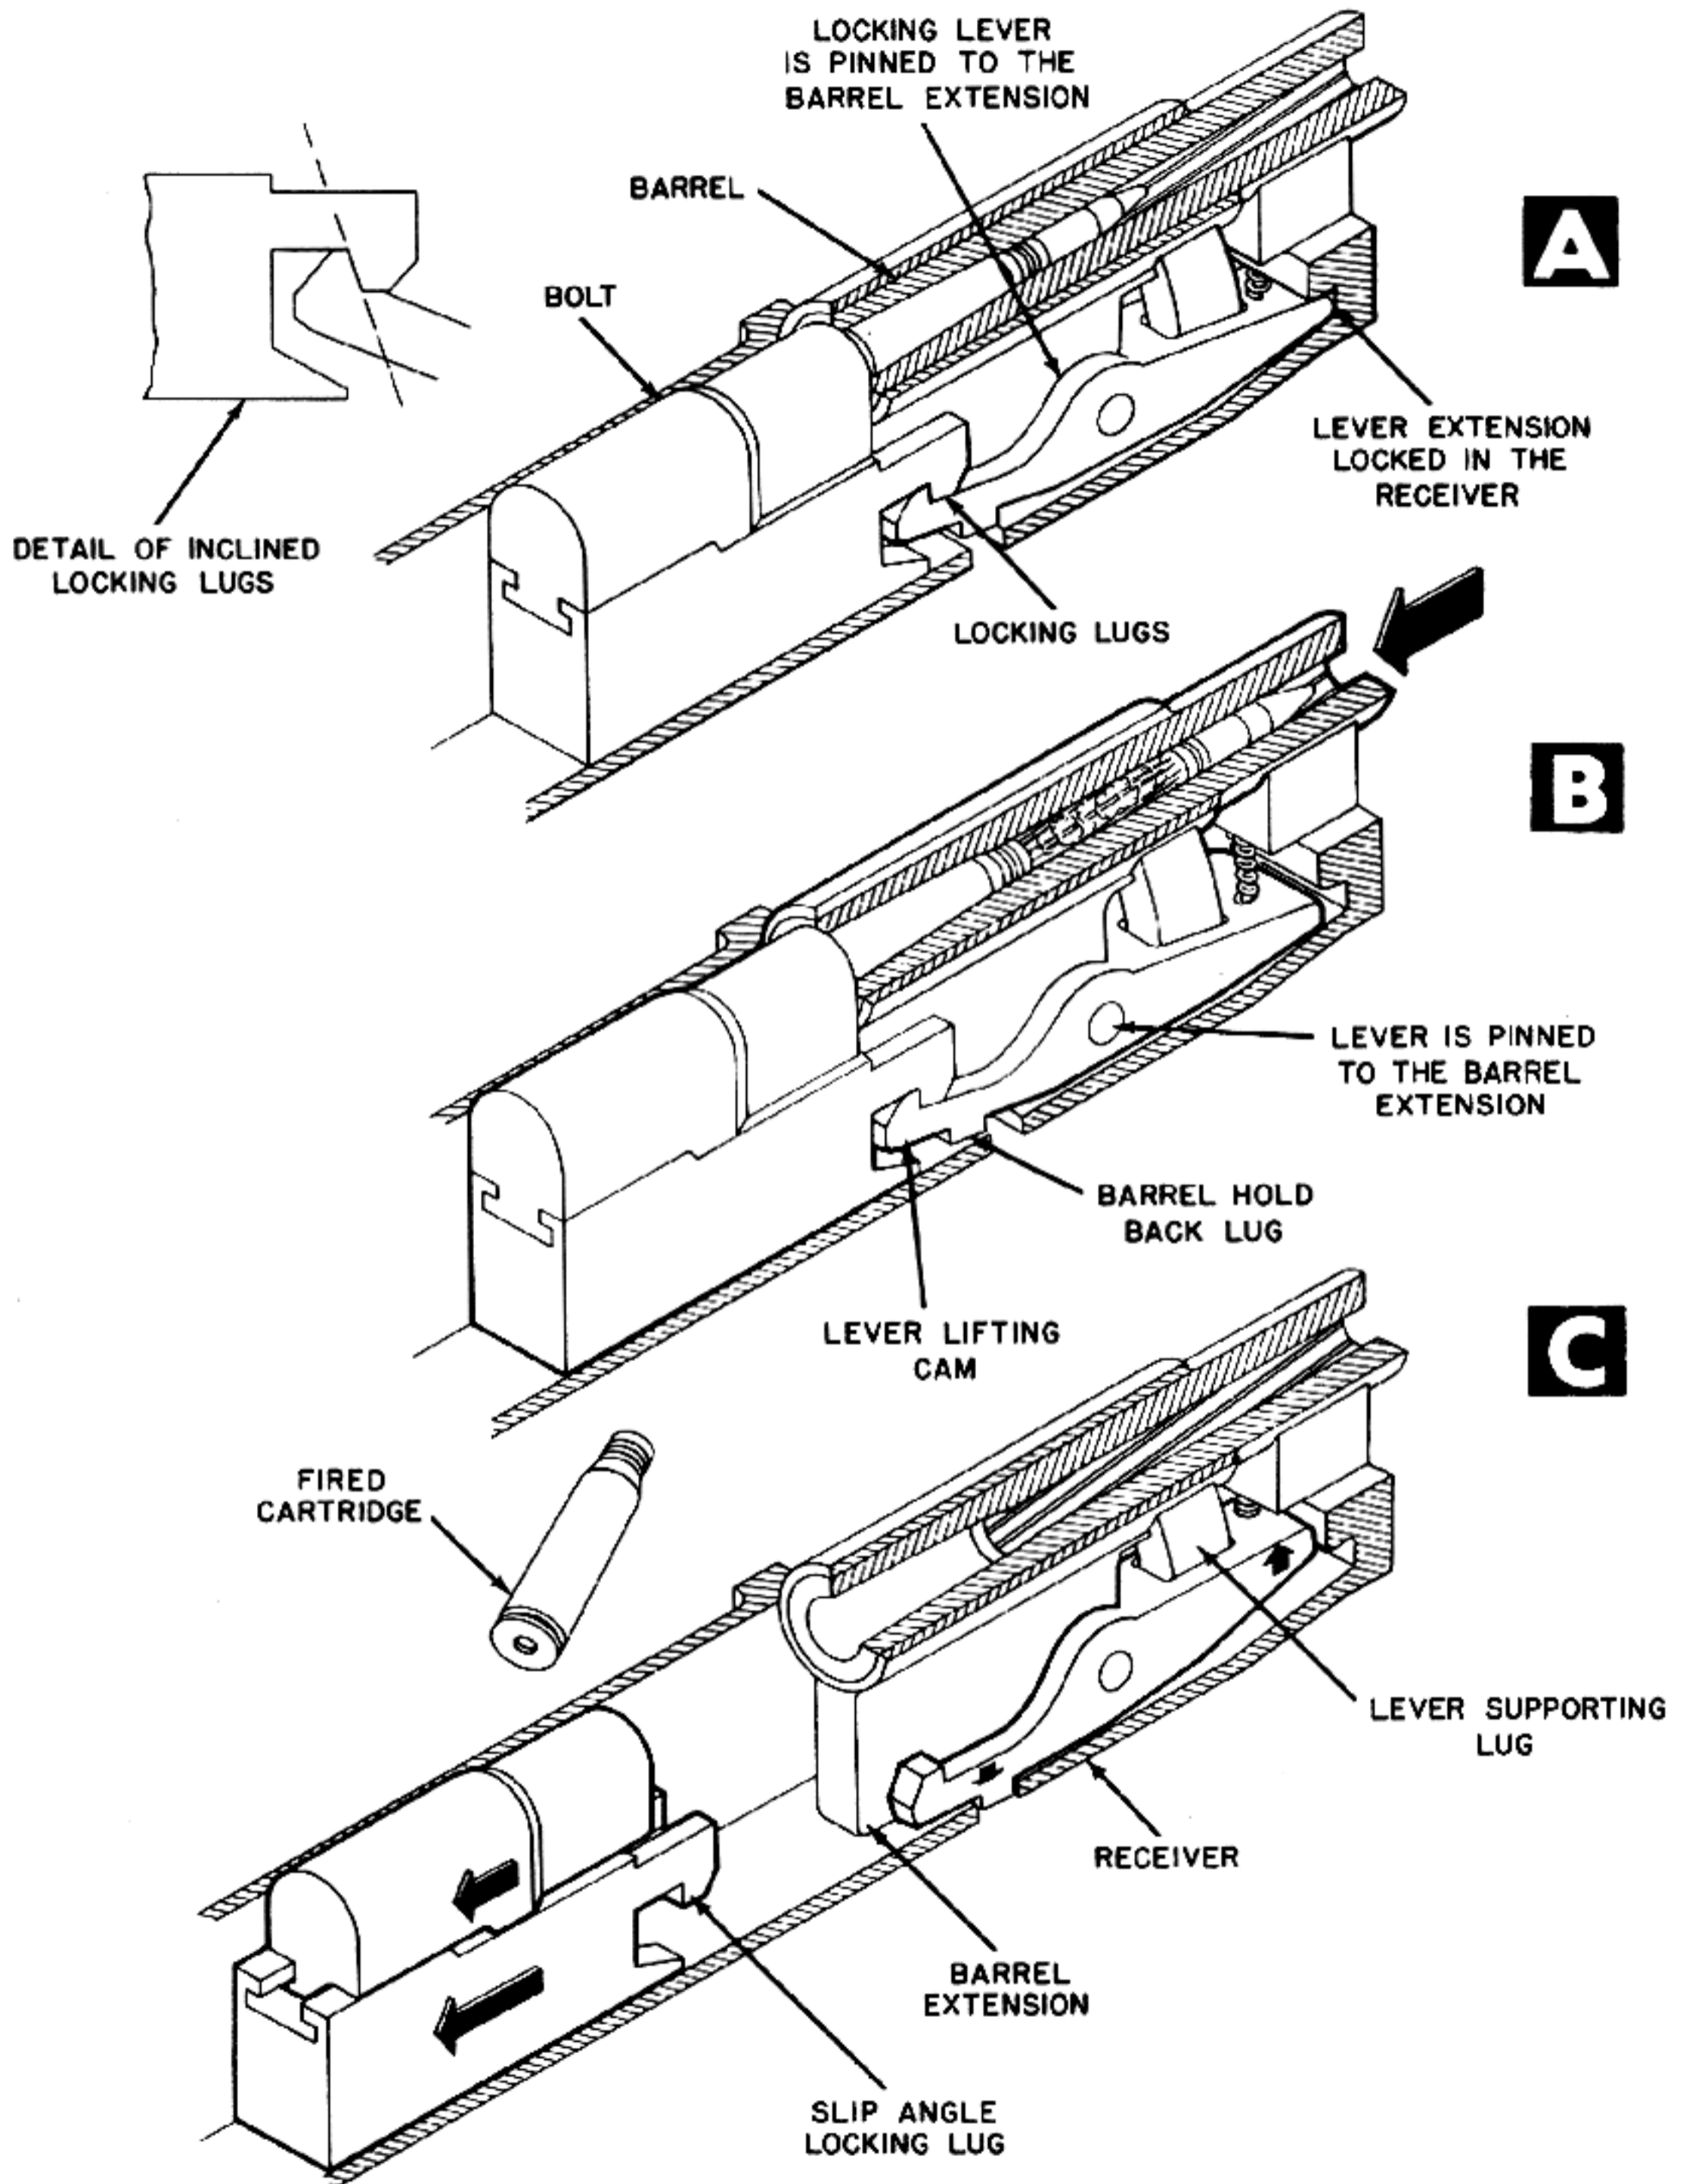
Lever on Barrel Extension Locks Bolt to Barrel.
